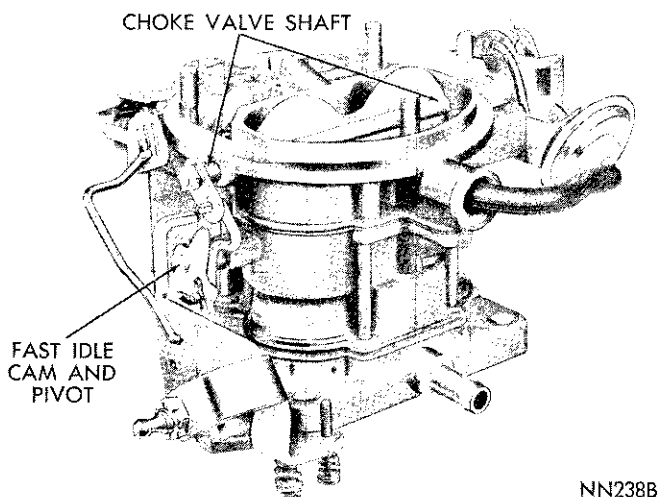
Choke Valve Shaft and Fast Idle Cam
